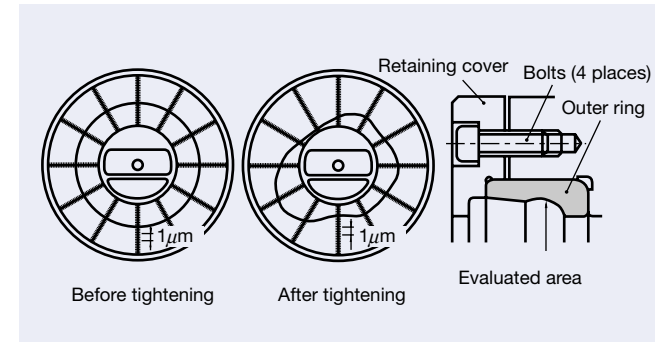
Raceway Surface Deformation Caused by Excessive Tightening
